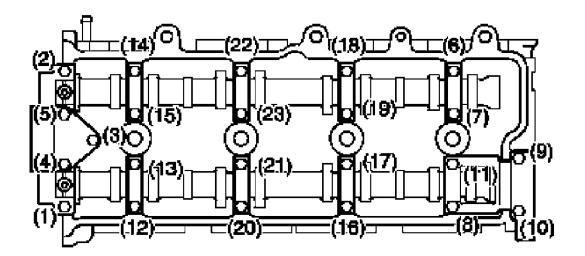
Identifying Loosening Sequence Of Camshaft Housing Bolts Courtesy of SUZUKI OF AMERICA CORP.
